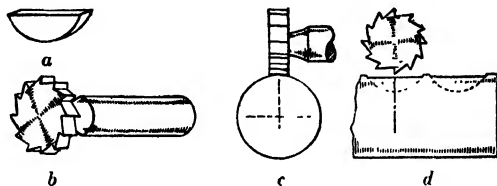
(a) Woodruff key; (b) cutter; (c) end view of setup; (d) side view of setup.
